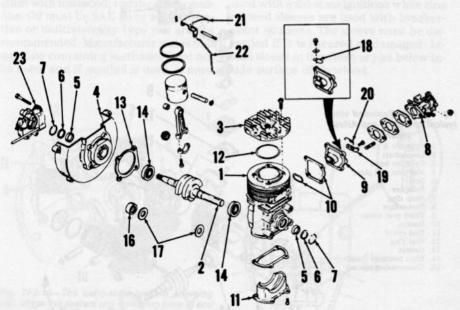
Exploded view of AH520 engine. Supplementary reed valve is shown at (18) and governor parts at (19 through 22).
